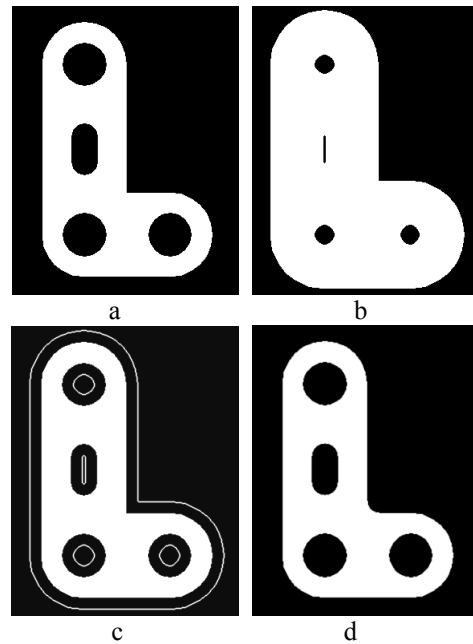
Generating 2D toolpaths by morphological erosion: a) the workpiece model; b) dilated image; c) tool path; d) workpiece with rounded corners.
